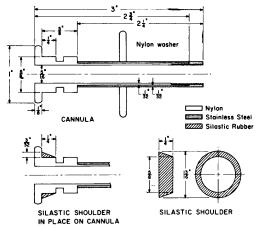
Mechanical drawing of cannula and Silastic shoulder.
